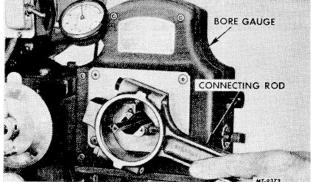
Checking Connecting Rod Bore Using Precision Gauge Furnished with Honing Machine SE-2218
